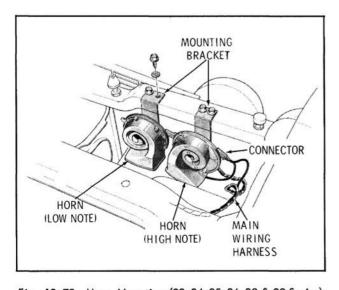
Horn Mounting (33-34-35-36-38 & 39 Series)
